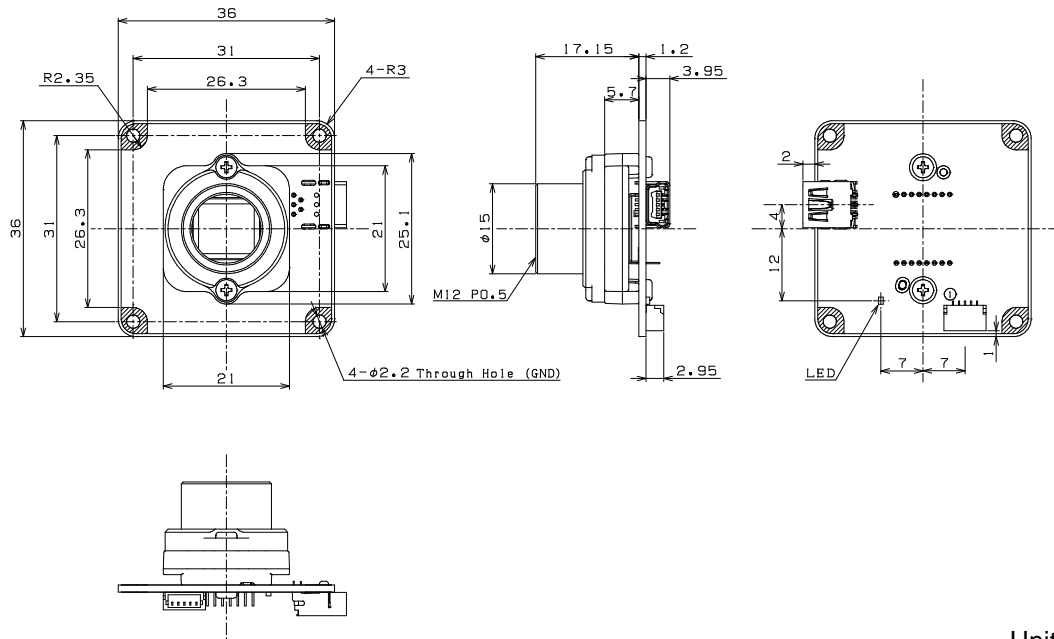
Mechanical dimensions(STC-SCxxxUSB-BL / STC-SBxxxUSB-BL)
